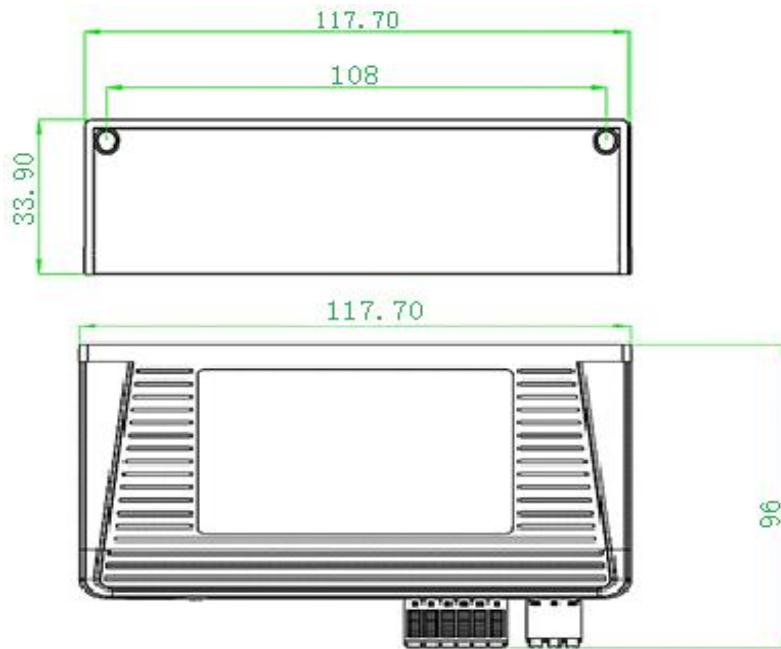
Machine dimension of JMC 2HCS528/558-R/RC Drive (unit: mm)
